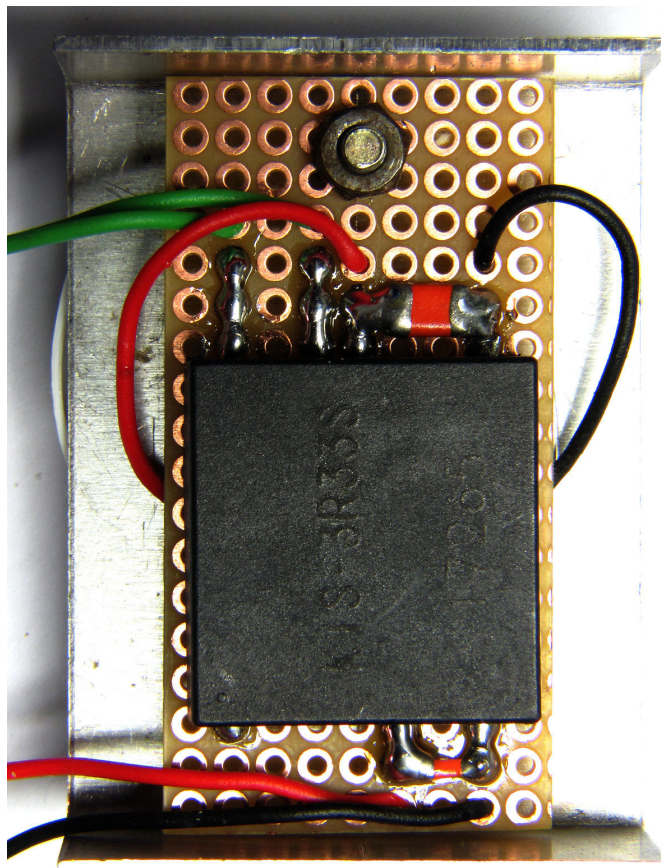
Driver module mounted on the back of the carrier/heat sink
